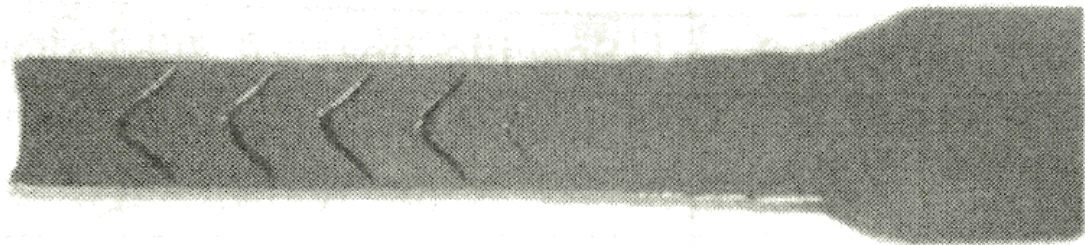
Appearance of chevron cracks in cold multi stage extrusion ¹⁻⁷⁾
